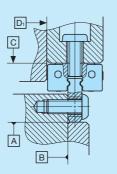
Reference mounting surface of LWL1···Y and typical mounting structure ②
